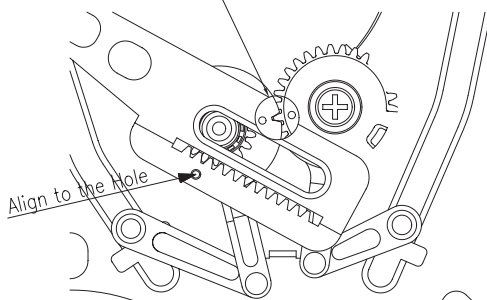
Assembly of the L/R LOADING AS and the LOADING RACK
